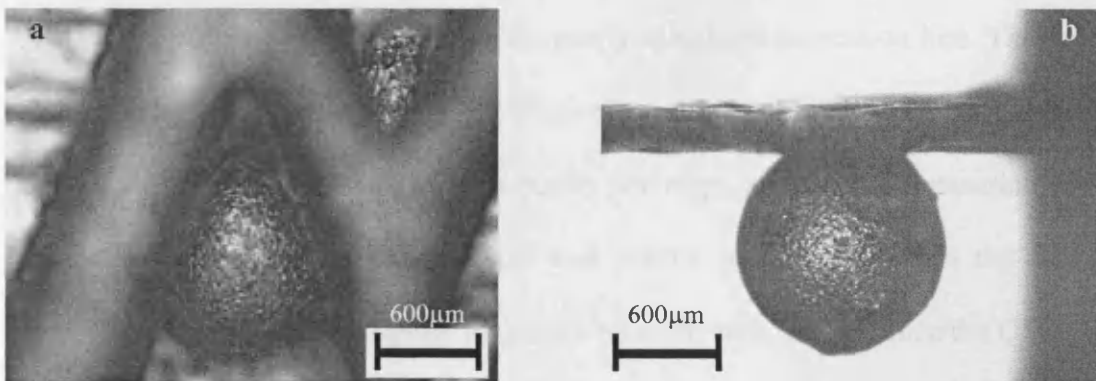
Casting defects due to embedding problems: a) Logo “M”; b) Rib.
